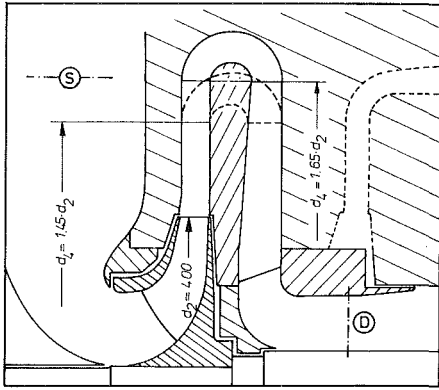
Arrangement of impellers to investigate the diffuser diameter ratio
